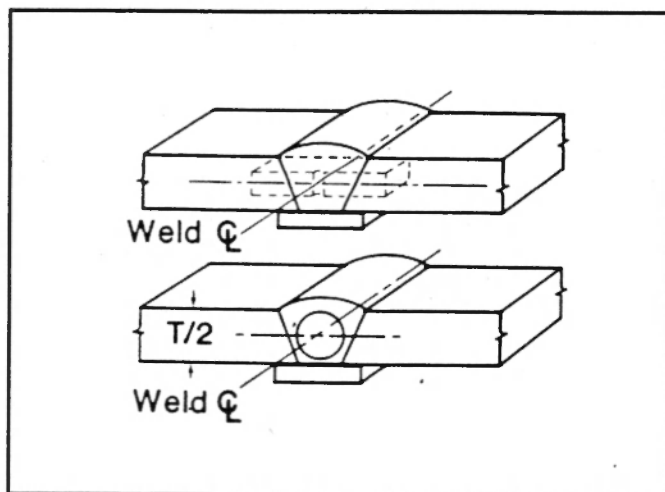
Location of test specimens in all-weld-metal deposit.
